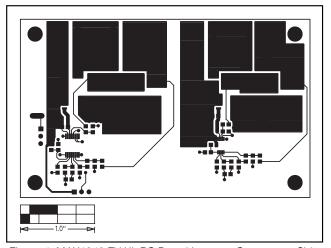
MAX1846 EV Kit PC Board Layout—Component Side
